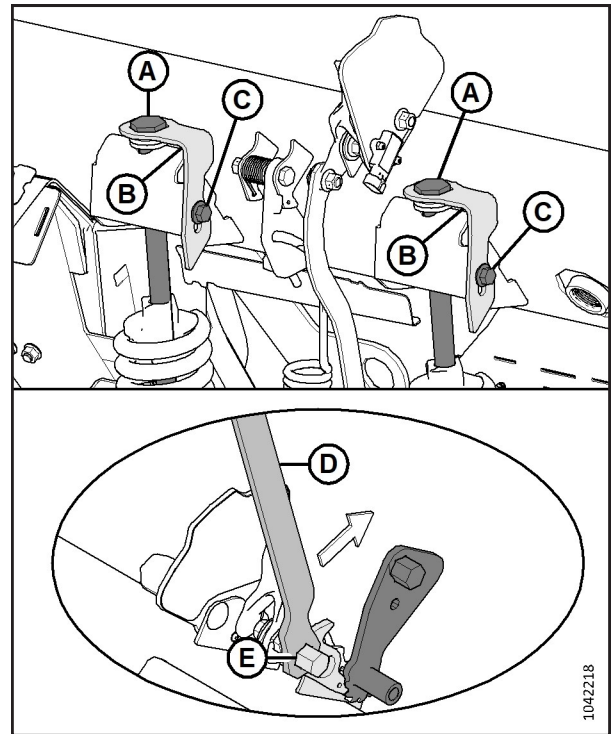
Float Adjustment Bolts and Multi-Tool on Pawl
